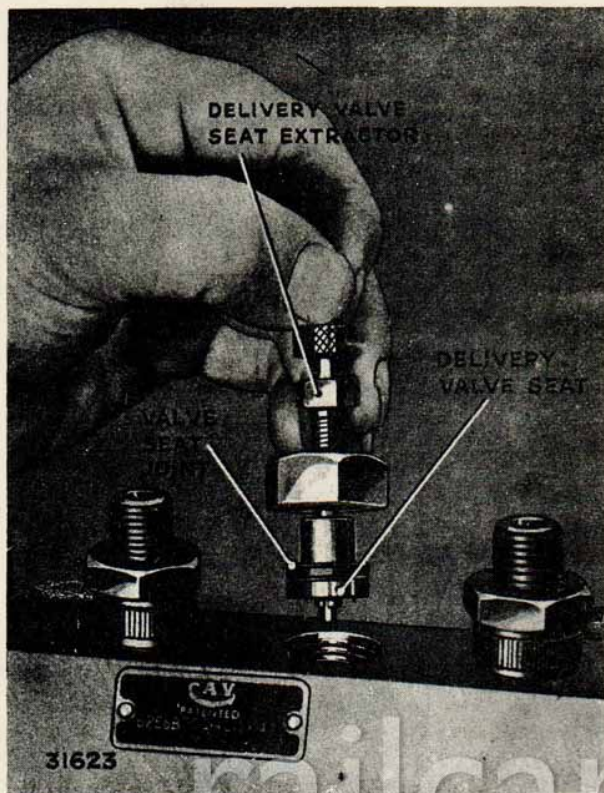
REMOVING DELIVERY VALVE SEATING.
